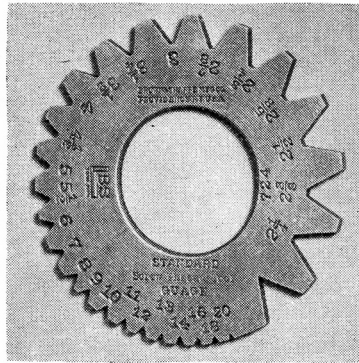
Standard screw thread tool gage for grinding thread-cutting tools.
